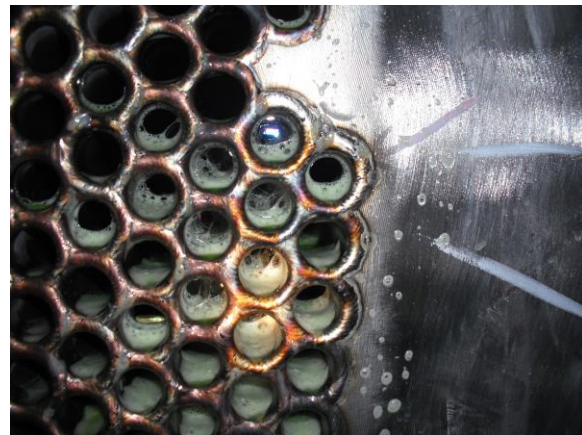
DPT of Tube to Tubesheet Welds Fig 14 – Soap bubble solution applied to test welds
